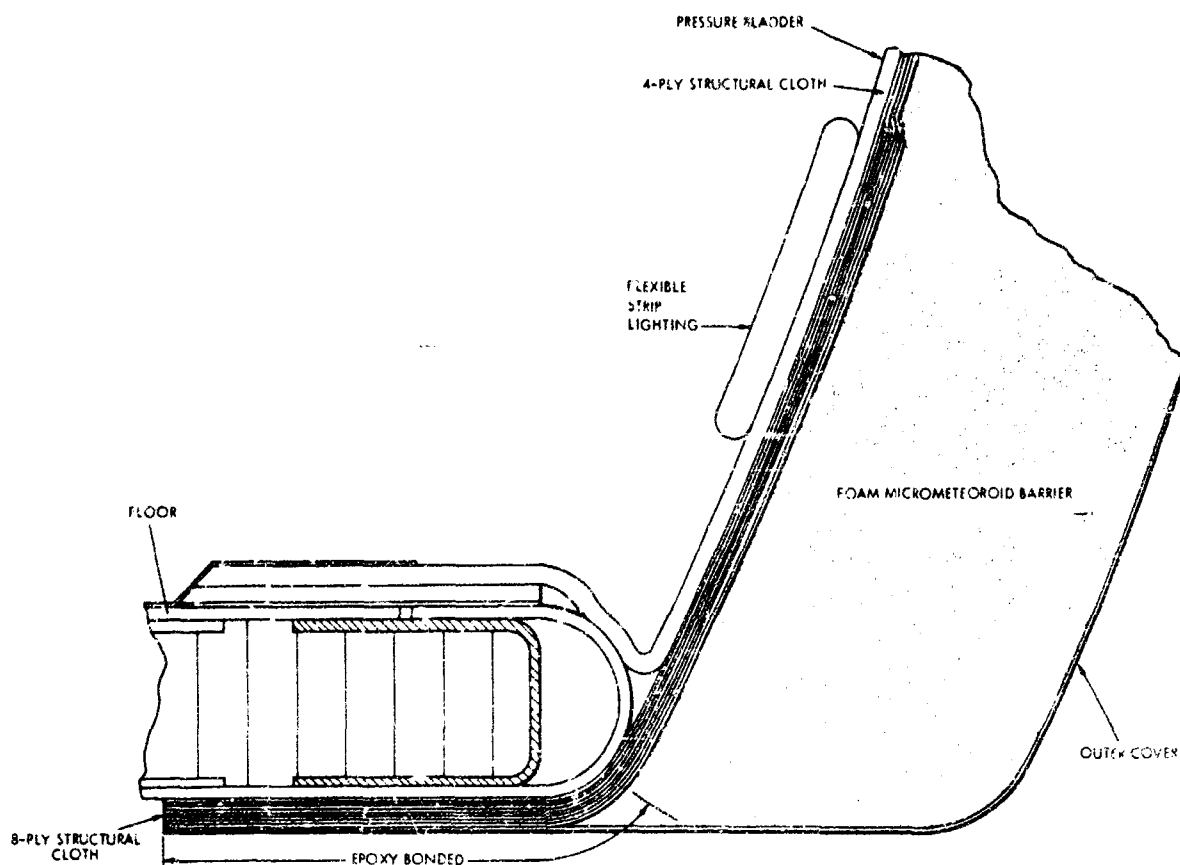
Structural Joint between Expandable Wall and Rigid Floor
